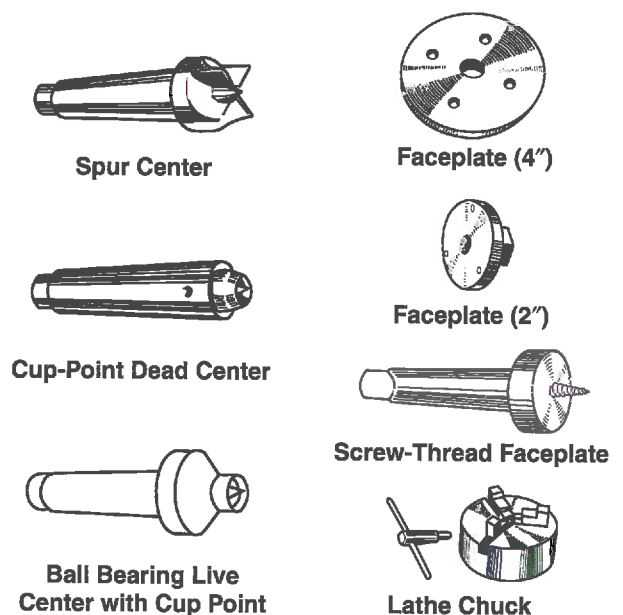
Stock is mounted with various accessories. (*Delta International Machinery Corp.*)
